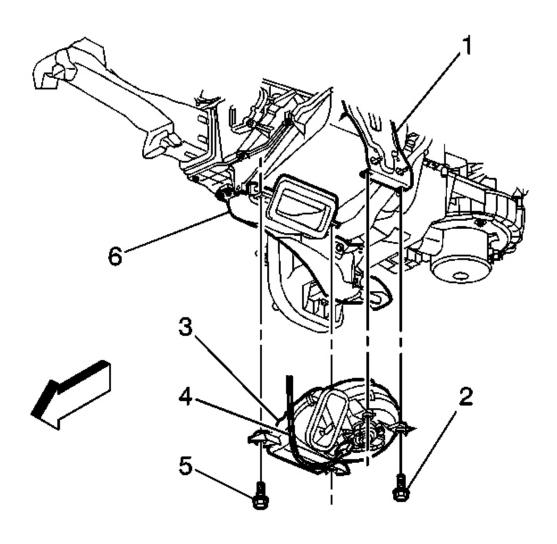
Identifying Auxiliary Blower Motor & Components Courtesy of GENERAL MOTORS CORP.
